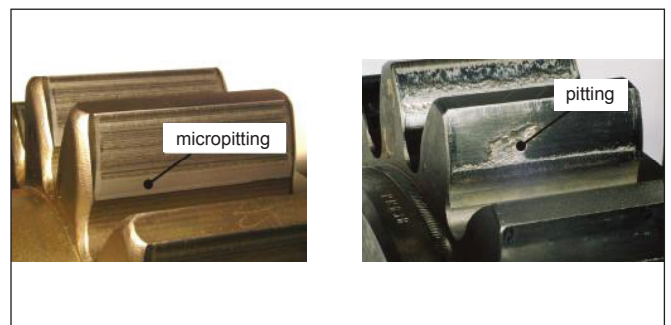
Gear flanks with micropitting (left) and pitting (right).
